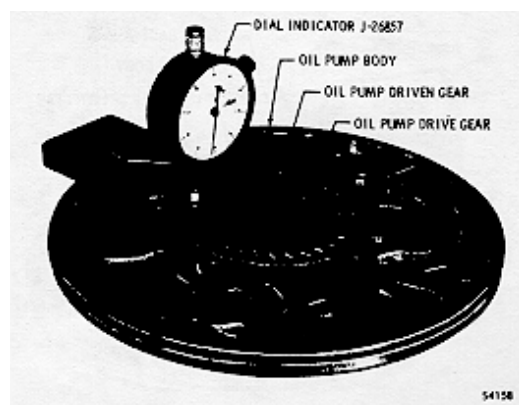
Dial indicator check of oil pump drive gear end clearance
